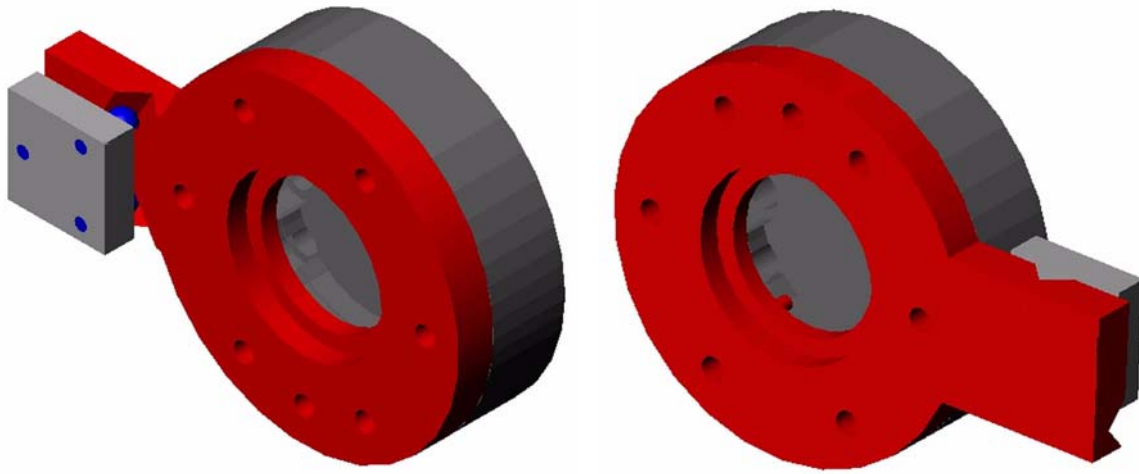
Paddle Flange Plate with Sensor Unit on Front Mount Figure 3.18 Paddle Flange Plate with Sensor Unit on Rear Mount
